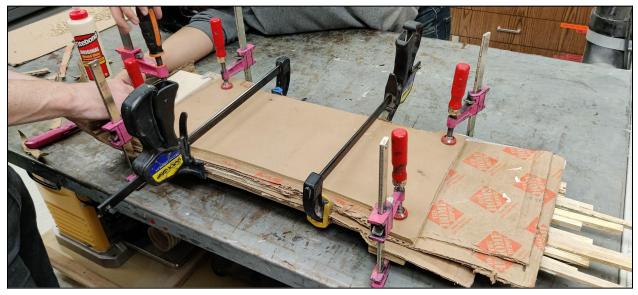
First attempt at gluing the board using wood to compress the fronds into a plane.
